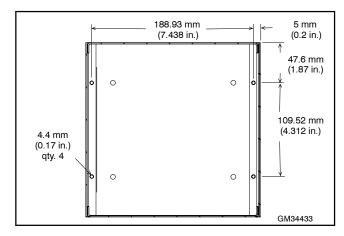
Drilling Mounting Holes in Hoffman Box for RSA Front Panel Assembly
